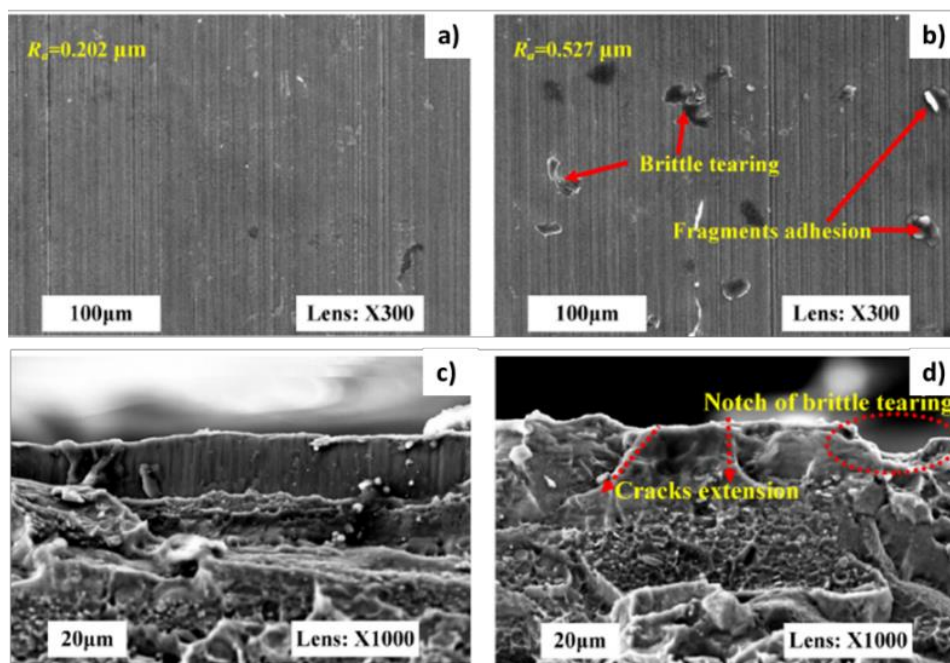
a) and b) SEM micrographs of machined surface; c) and d) SEM micrographs of fracture surface morphology of machined parts (adapted from Wang and Liu 2016).
